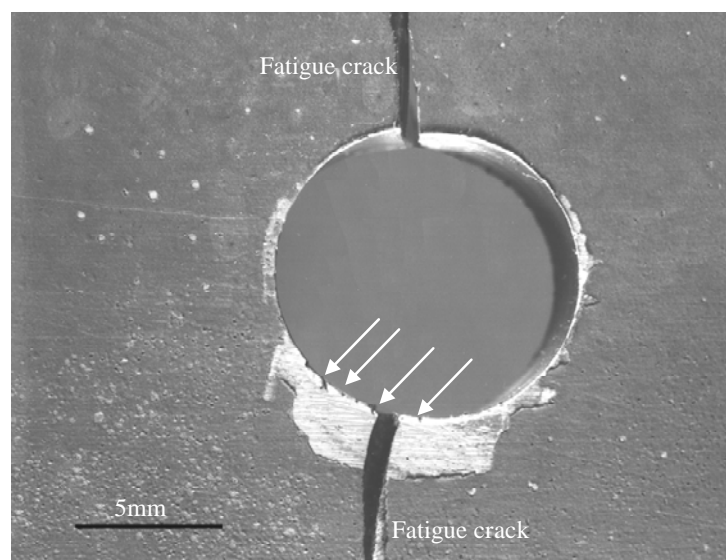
Example of a hole that was poorly finished in a main wing spar made from an AA7075-T6 extrusion. The upper fatigue crack initiated from a split in a burr at the edge of the hole. The lower fatigue crack initiated from a nick on the edge of the hole: other nicks are indicated by the small arrows.
